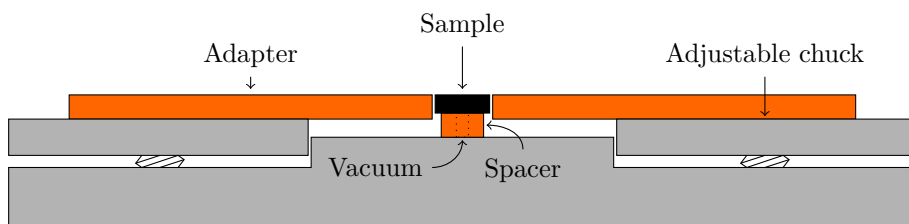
Cross-section illustration of through hole adapter mounted on the wafer chuck
